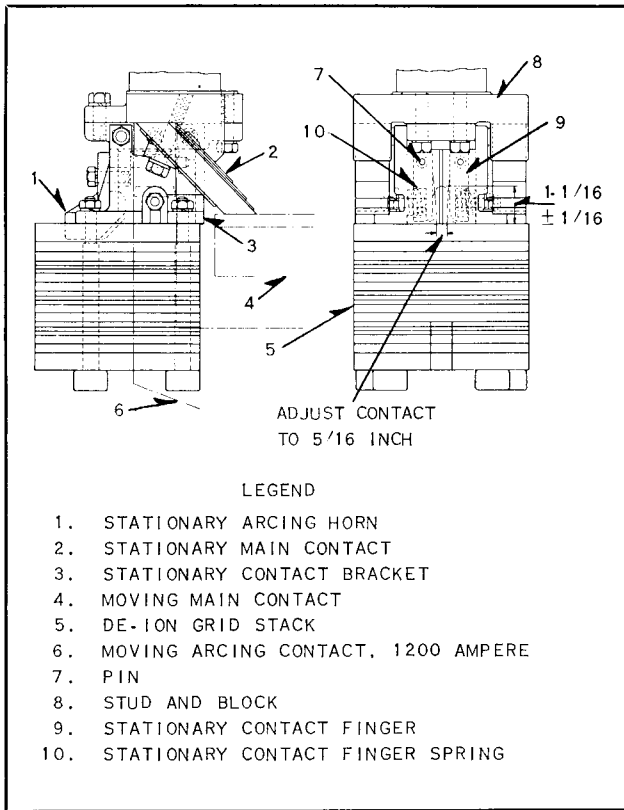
"De-ion Grid" Contact Assembly, 1,200-Ampere
